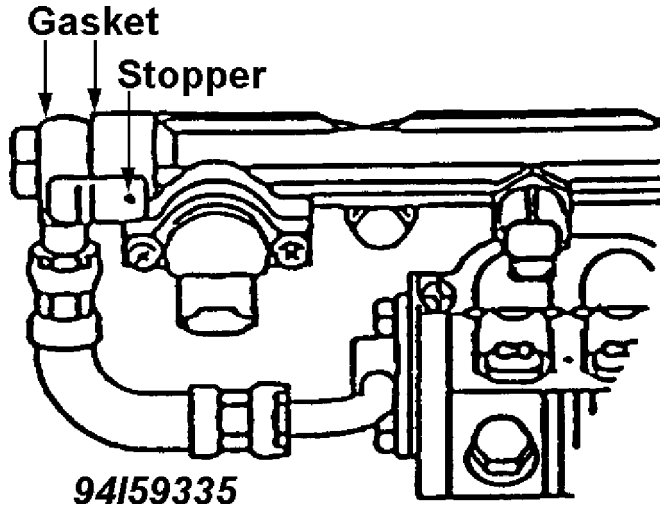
Installation of Fuel Hose on Secondary Fuel Distributor
